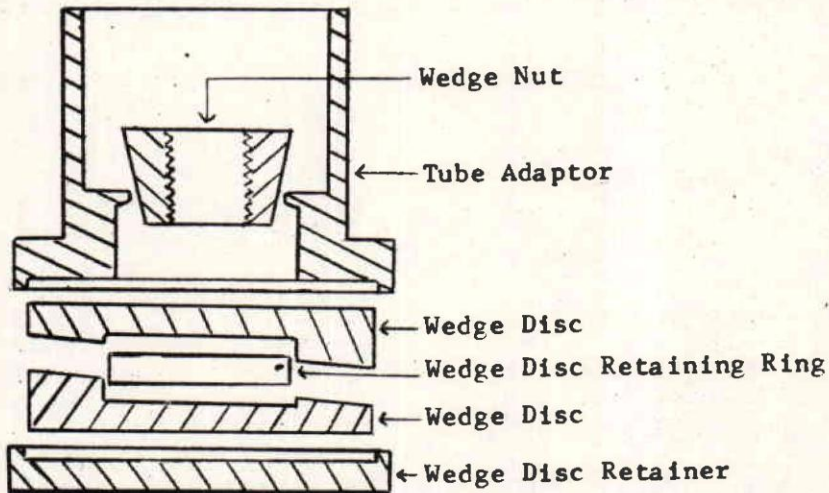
Sketch of a Winnipeg wedge disc unit.
